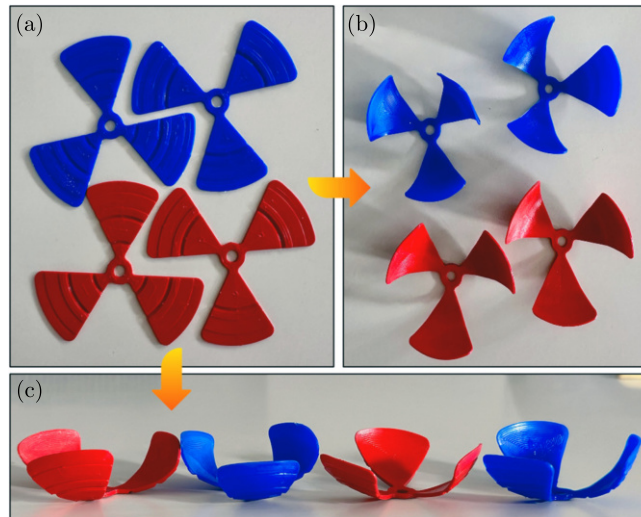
Shape transformation of flower-shaped specimens: (a) 3D printed parts; (b) front view after thermal activation; (c) perspective view after thermal activation.
